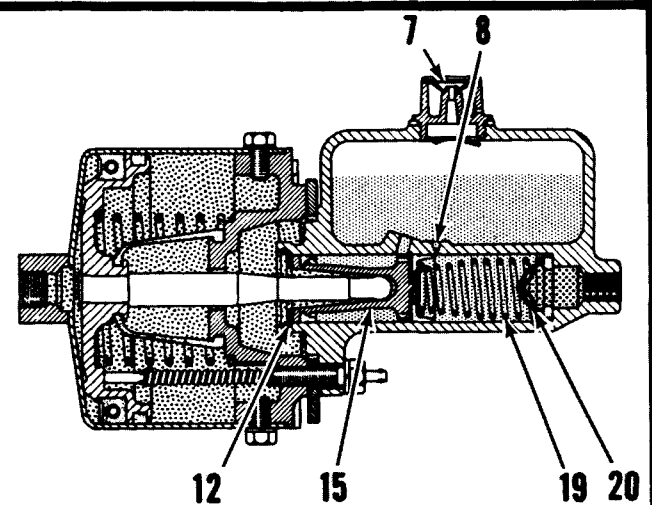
BYPASS OPEN, CHECK VALVE CLOSED.
